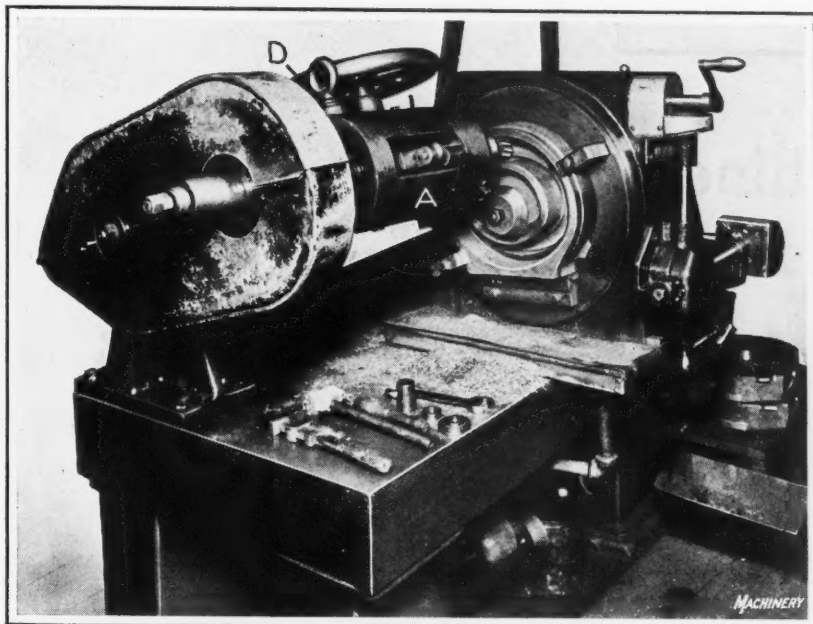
Cam Milling Machine with Swinging Spindle Frame
